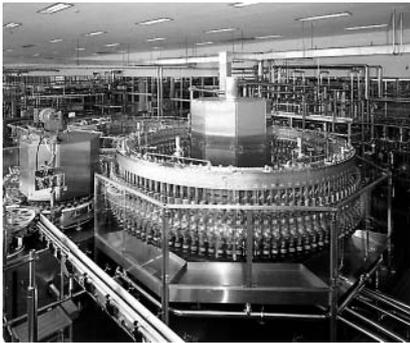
Flow meter type PET bottle filling machine (1 000 bottles/min)
